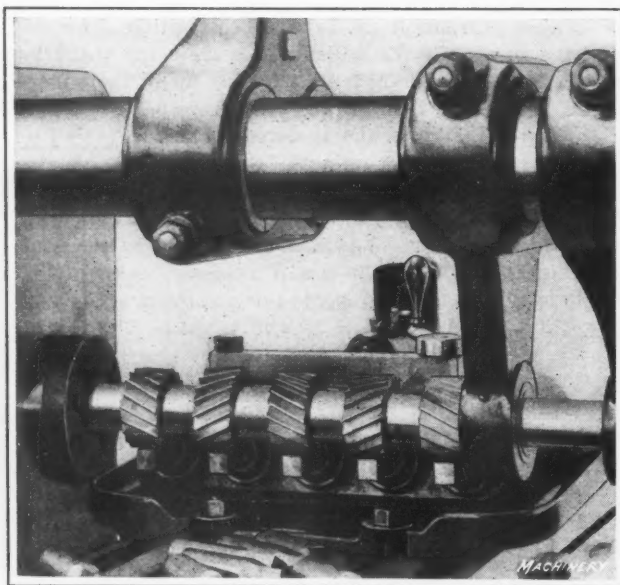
Milling Machine equipped with Indexing Fixture for simultaneously milling the Sides of Five Square Piercing Punches. Details of this Fixture are shown in Fig. 9
